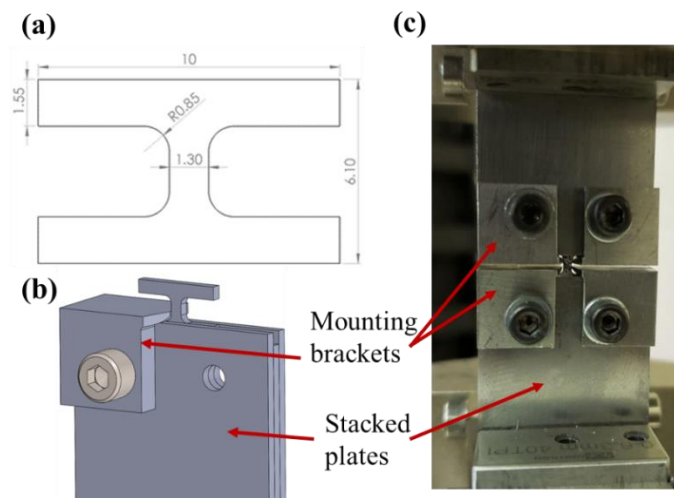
Setup for CT and TC tests in ND; a) specimen geometry (dimensions in mm), b) conceptual design, and c) clamped fixture and specimen assembly.
